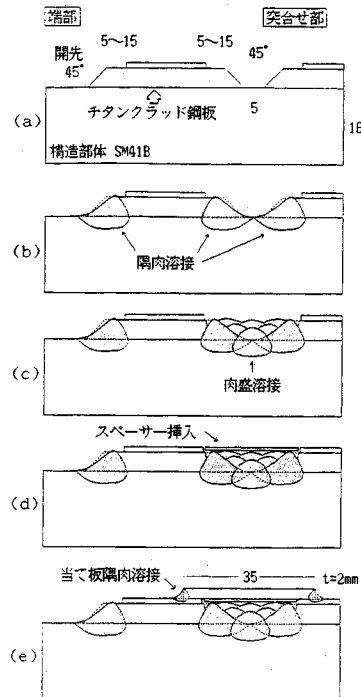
Schematic drawings of recommended form of groove and procedure to weld titanium clad steel sheet.
